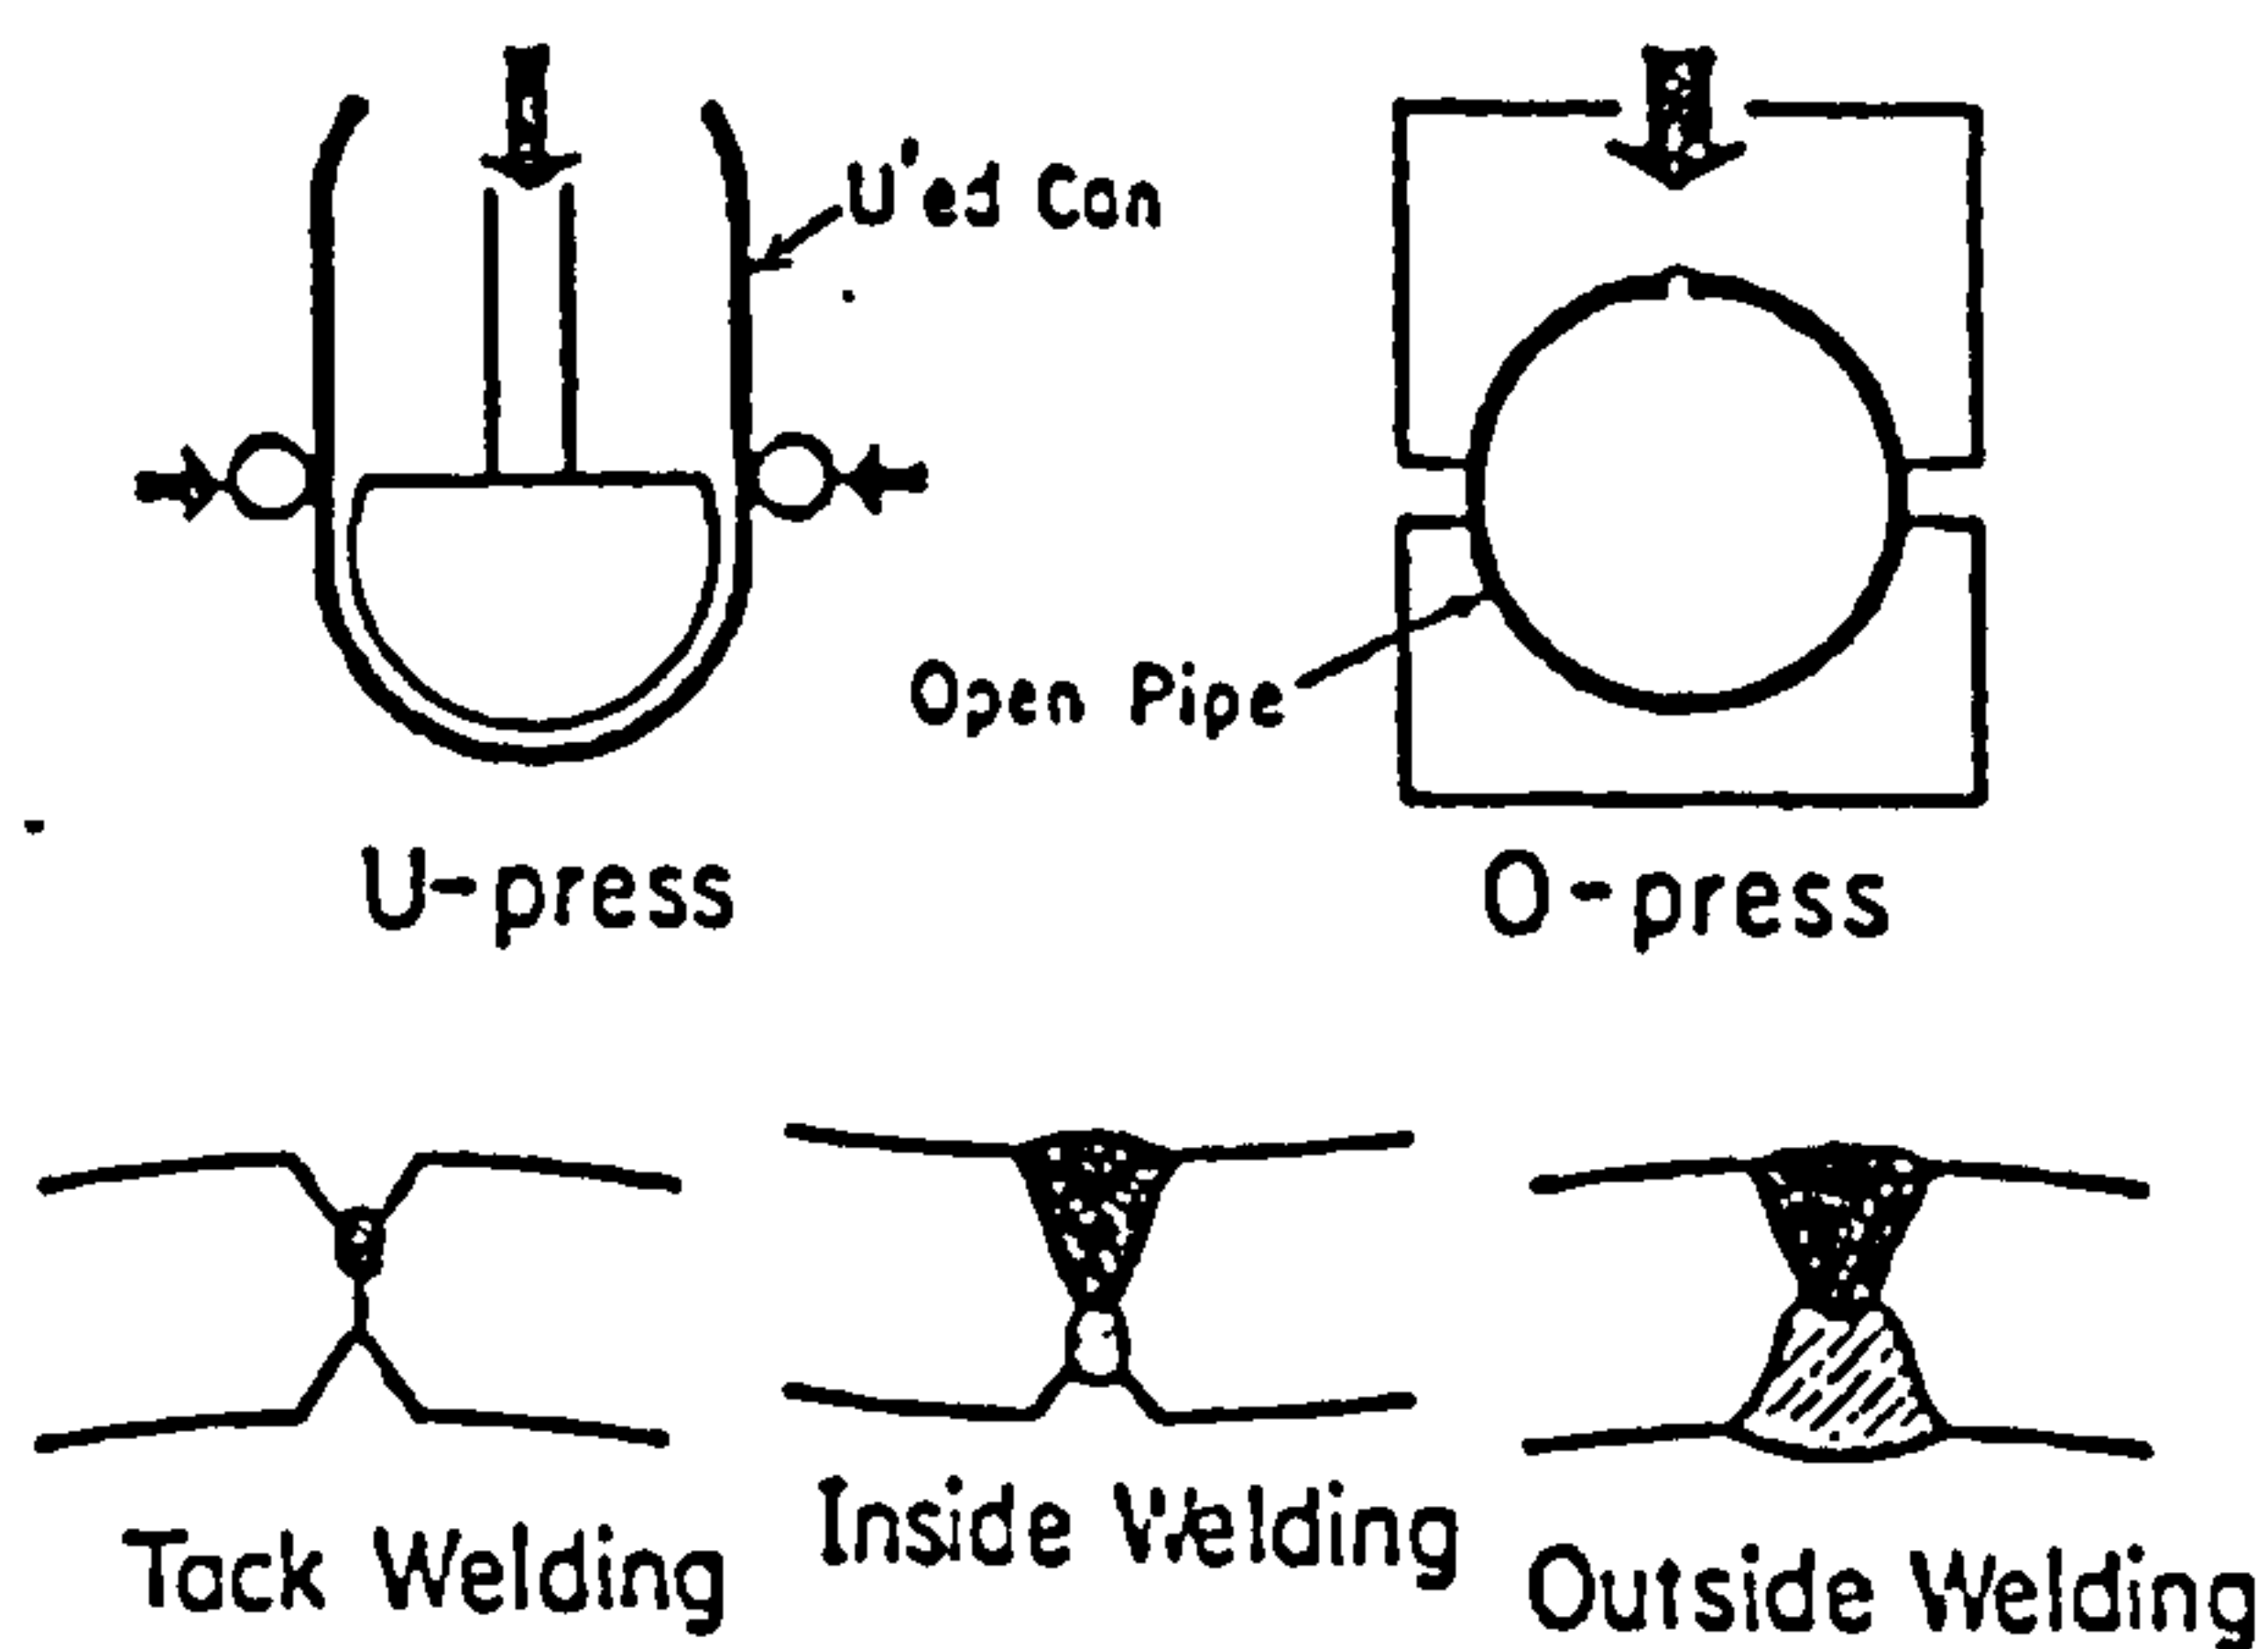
Forming and longitudinal seam welding of UOE pipe (after ref. 70)
